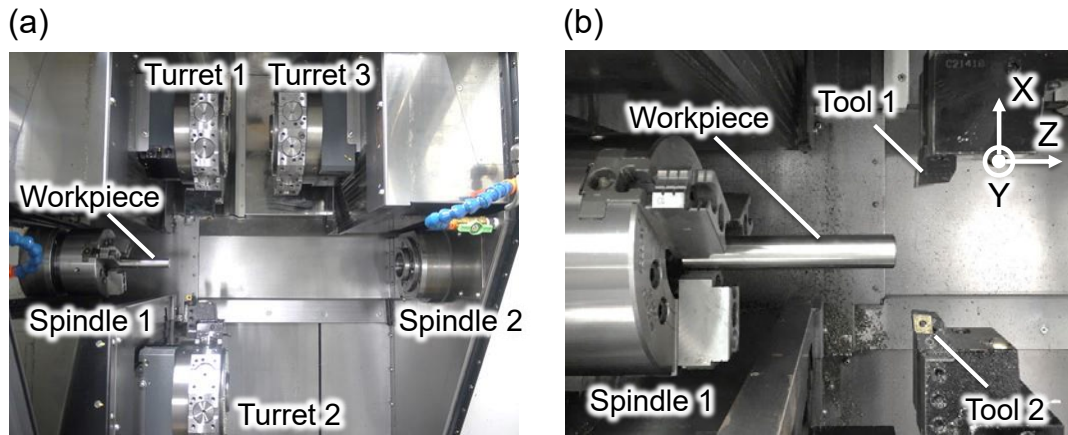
Prototype of multi-tasking machine tool (a) front view (b) expanded view
